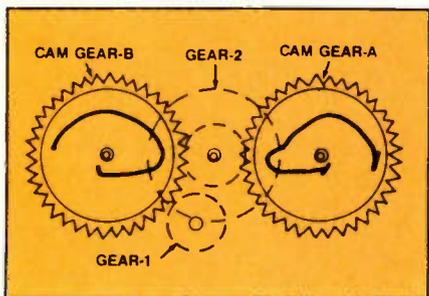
To set the loading mechanism to the eject position, you need to remove the two loading motor mounting screws (B in Figure 1), then move the loading motor away from gear 1. Manually rotate gear 2 counterclockwise until a stop is reached. Finally, reposition the loading motor and install mounting screws (B). This figure illustrates the position of the cam gears in the eject position.
